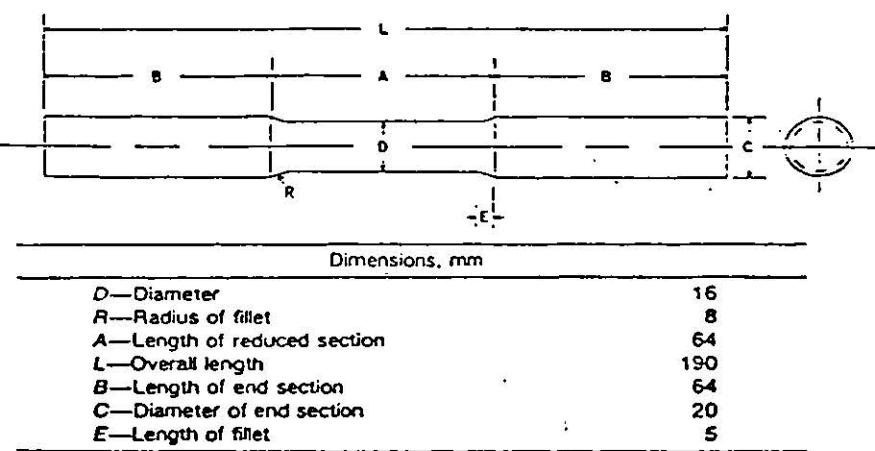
Standard Tension Test Specimen for Malleable Iron
